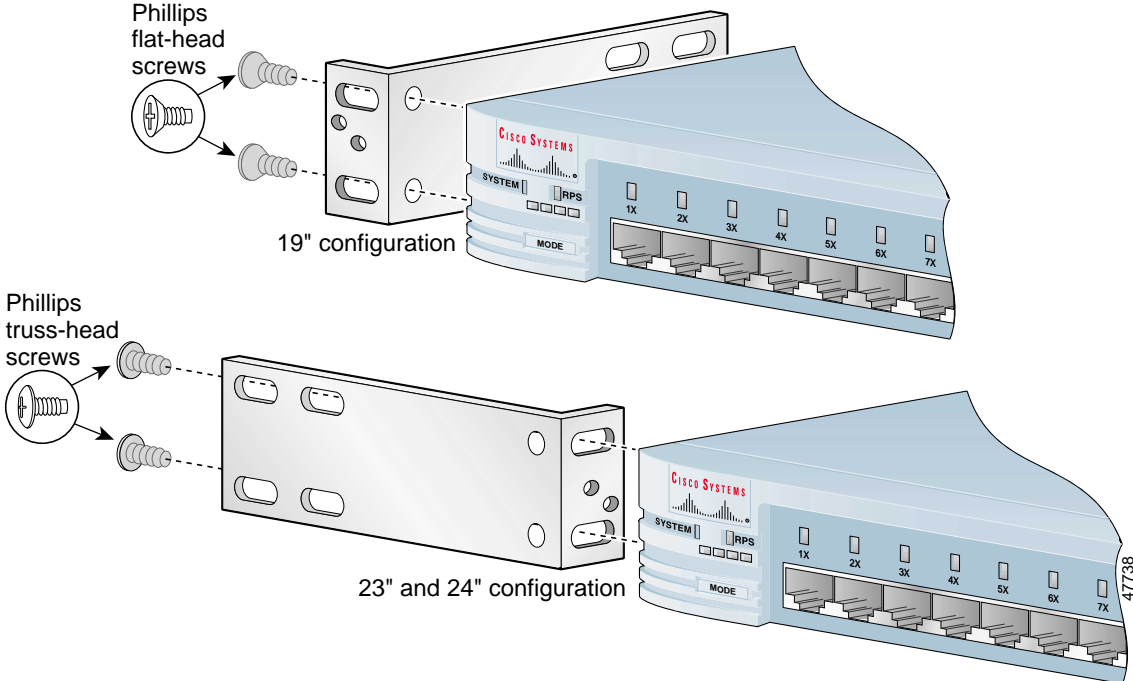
Attaching Brackets on Catalyst 2912MF XL and 2924M XL Modular Switches (Front-Panel Forward)
